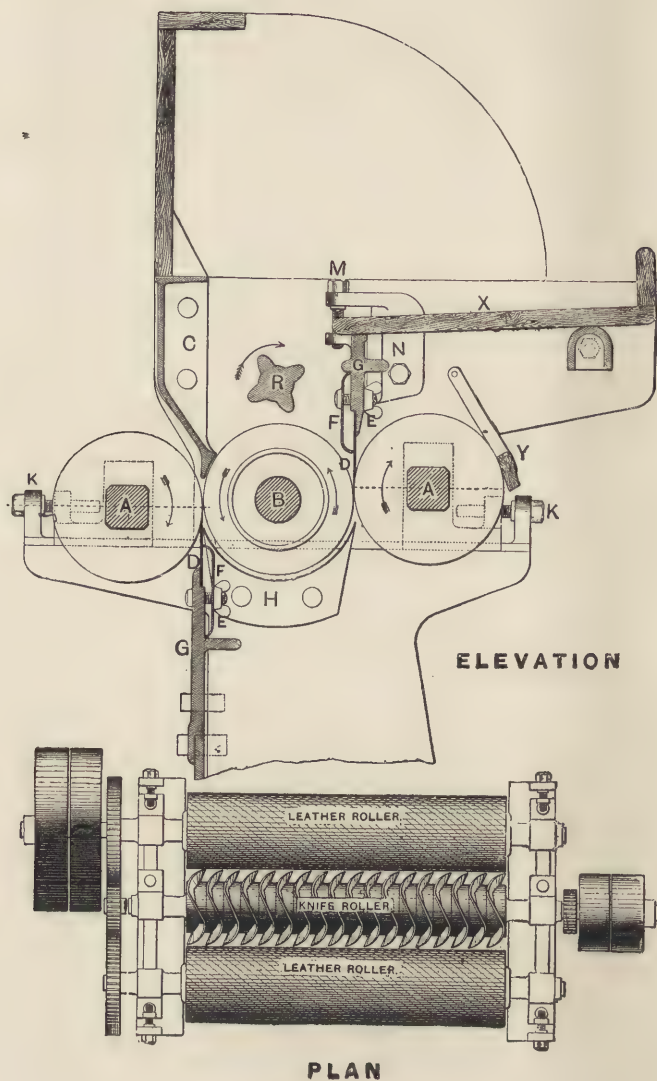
KNIFE ROLLER GIN. Plan and Section.
